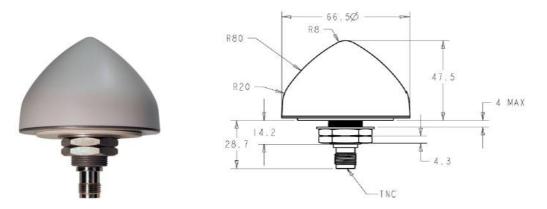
Antenna and Dimensions. Dimensions (mm).
